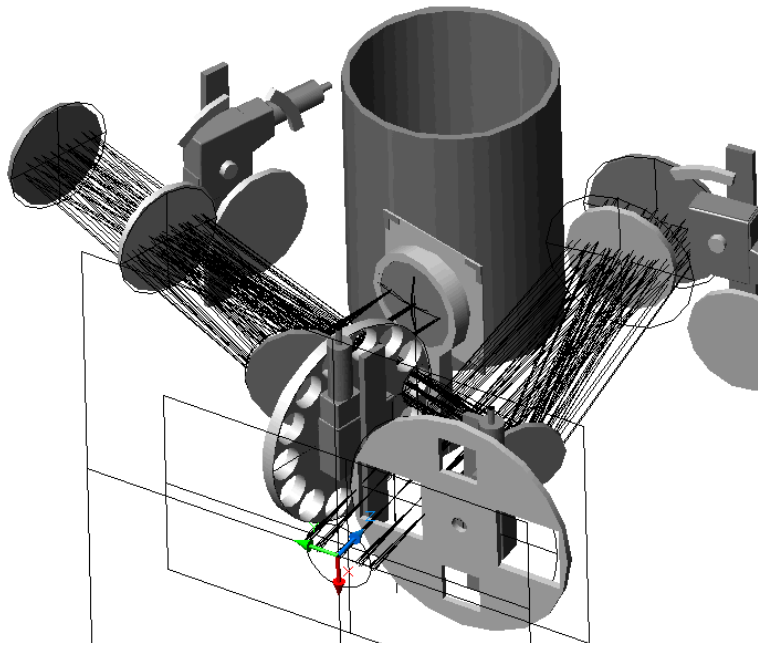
Master model of a previous layout used to proof space envelopes of each assembly.
